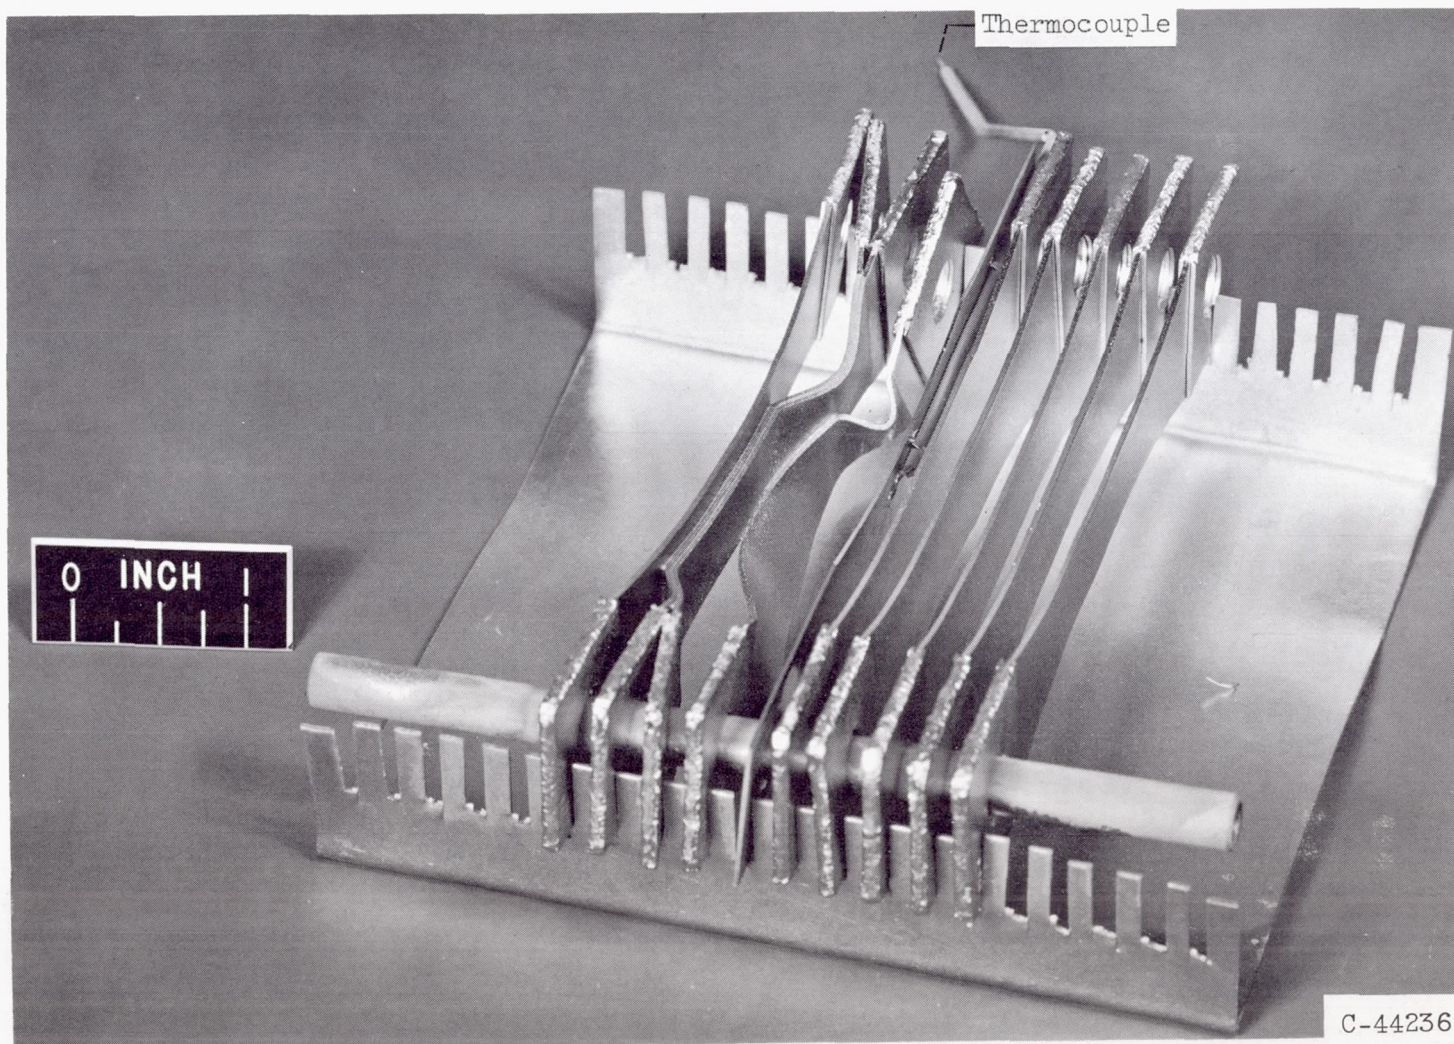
Sagging of Inconel 700 stress-rupture specimens heat treated at 2275° F following application of NiCrSiB. (Specimens to right of thermocouple are not braze coated.)
